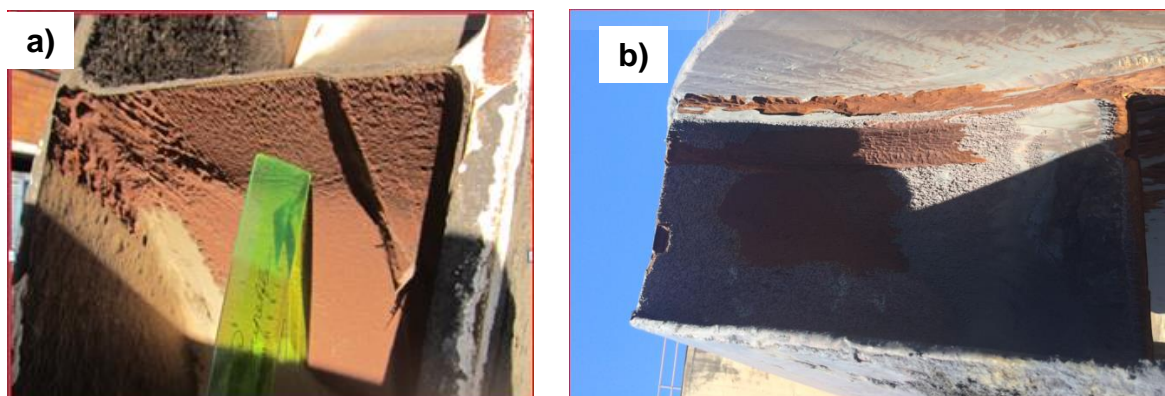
21: a) Inner surface worn blade made of Weldox 700 material. b) Inner surface worn blade made of S355JR material.
